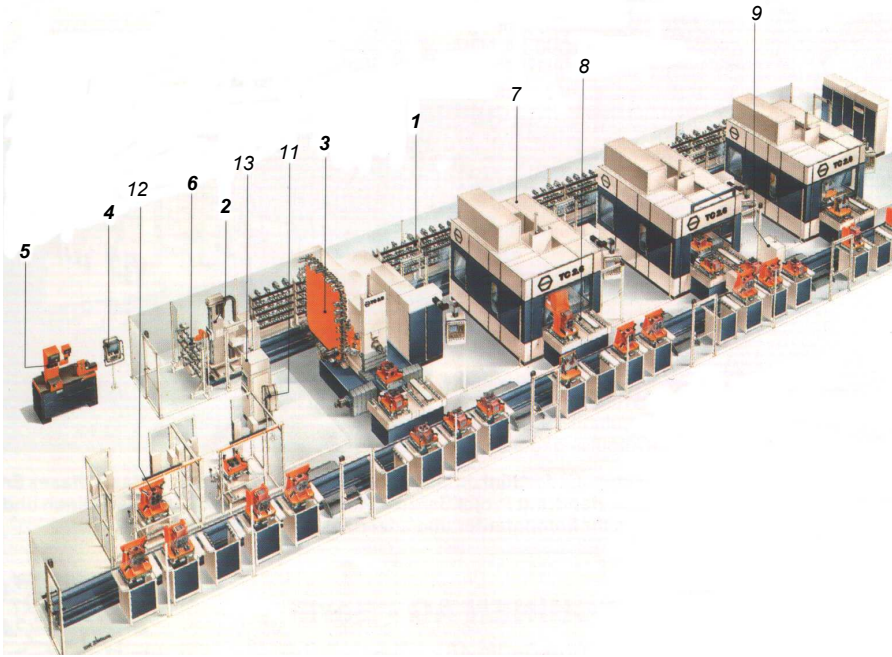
Flexible manufacturing system with the rack-type central tool store serviced by the manipulator realizing the tool transport function: 1 – FMS central tool store, 2 – mobile robot servicing the store and realizing the tool-exchanging task, 3 – tool-storage matrix, 4 – tool transport control, 5 - tool-gauging station, 6 – tool room, 7 – machining centre, 8 - pallet changer, 9 - work pallet transport, 10 – pallets leaving system area, 11 – pallet transport control, 12 – loading parts onto fixture pallet station, 13 – FMS central control
